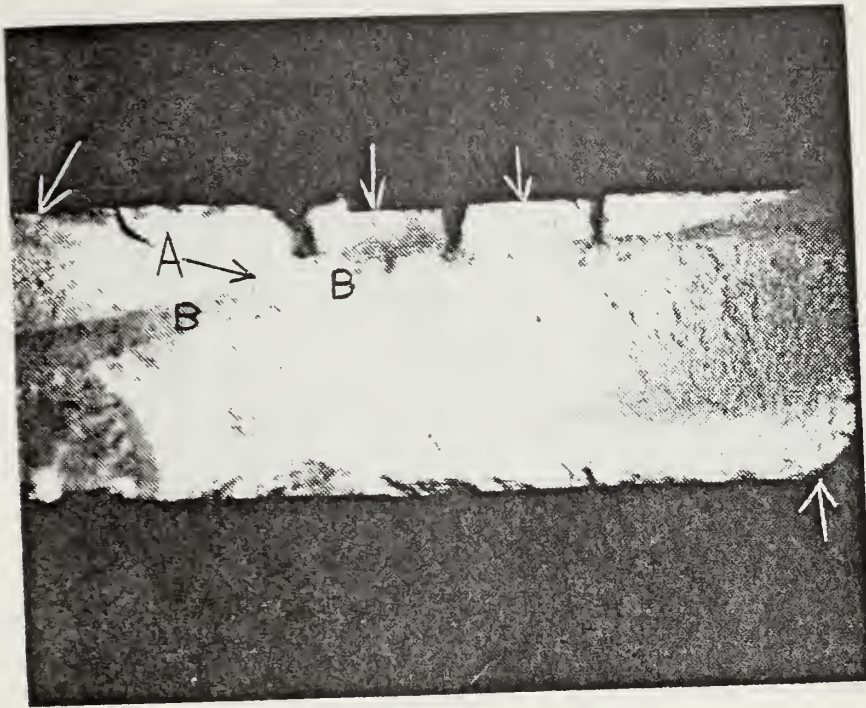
Macro-fractograph of a specimen AR-1-2 which was fractured after 25,300 cycles at 100 ksi, showing several fatigue zones with different crack origins (arrows) occupying the entire fracture surface. Boundary line A is a ratchet mark. Band area B is the fast fracture zone. X10.
